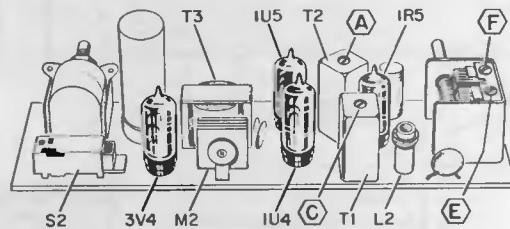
Top View of Chassis 4W2. Tube Locations and Alignment Points Shown.
